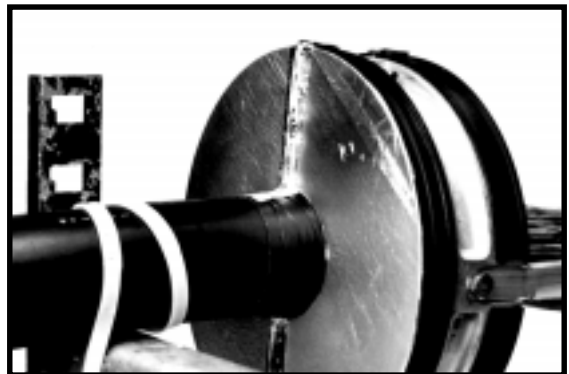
APPLYING HEAT SHIELD MATERIAL TO SEAM
